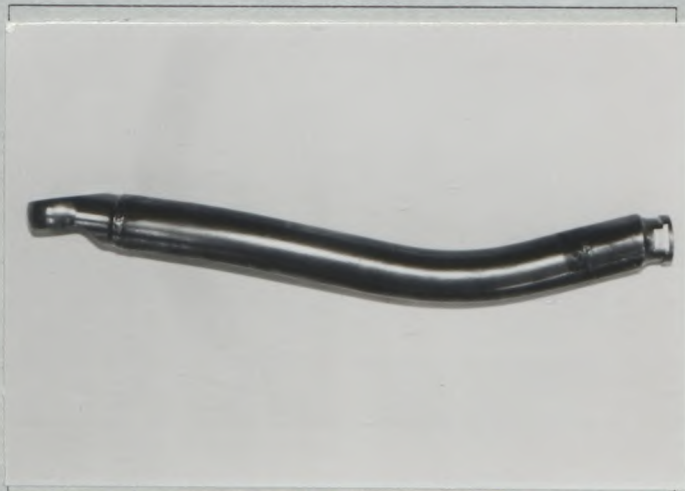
ADJUSTABLE STABILIZER ASSEMBLY
